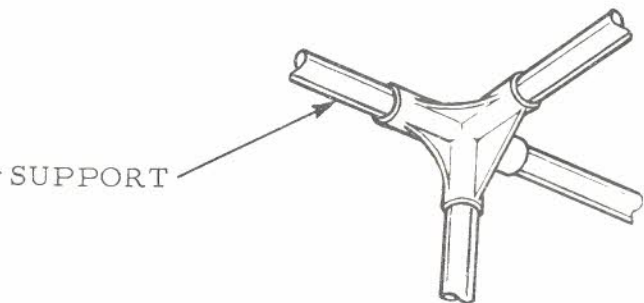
ANGLE TYPE SUPPORT SOCKET
